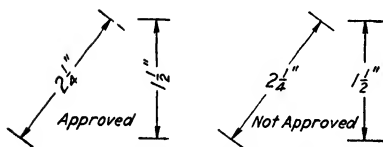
Dimensions should read either from bottom or from right-hand side.
